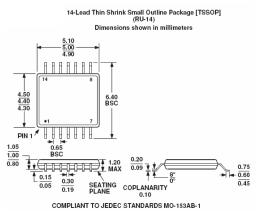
TSSOP-14 ---- Dimensions shown in millimeters
